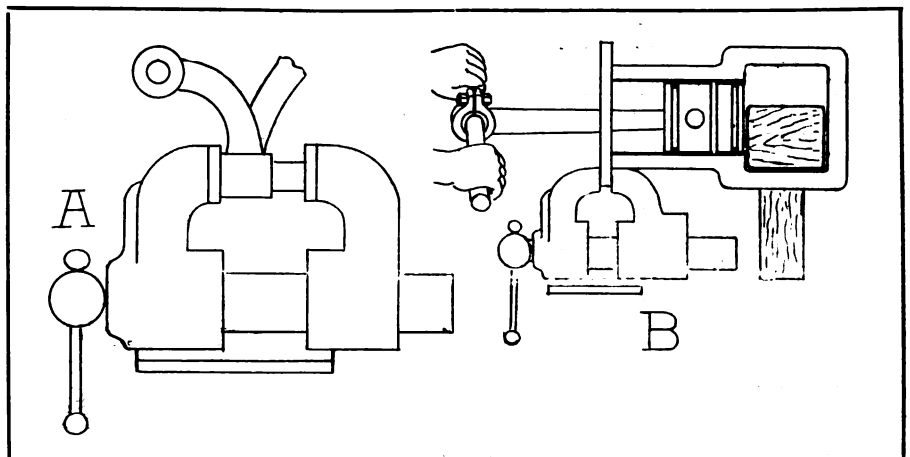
A, Using Vise as Press to Force in Steering Knuckle Bushing; B, Lapping Piston Rings.
